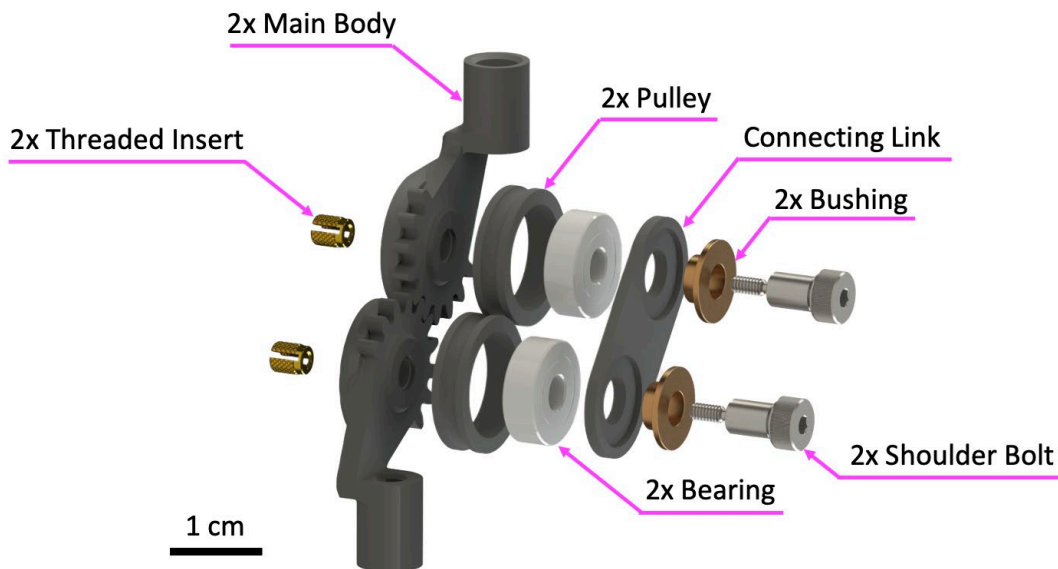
Exploded view of rolling joint. Main bodies, pulleys and connecting link are 3D printable. Simple and affordable hardware is used for assembly.
